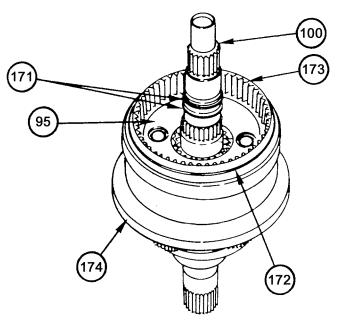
Input Shaft and Rear (P3) Carrier Assembly. (Repeated)
